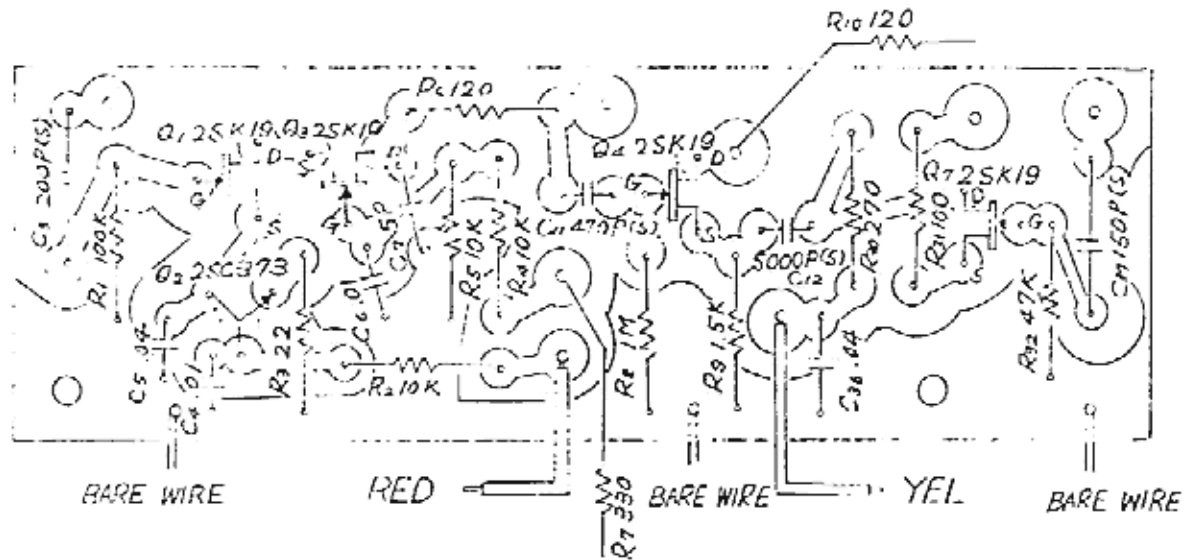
SUB PRINTED CIRCUIT BOARD TOP VIEW
